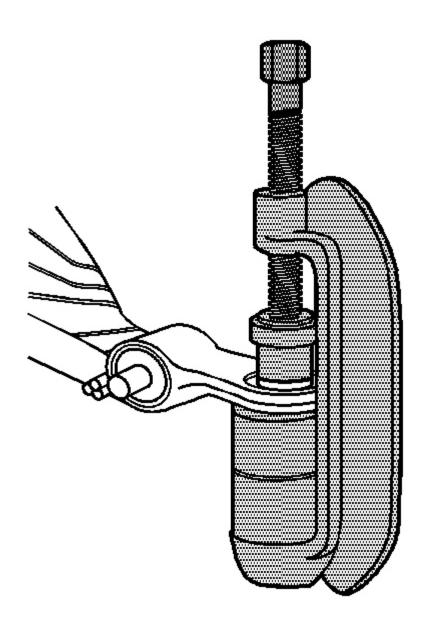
Removing Lower Ball Joint Courtesy of GENERAL MOTORS CORP.
